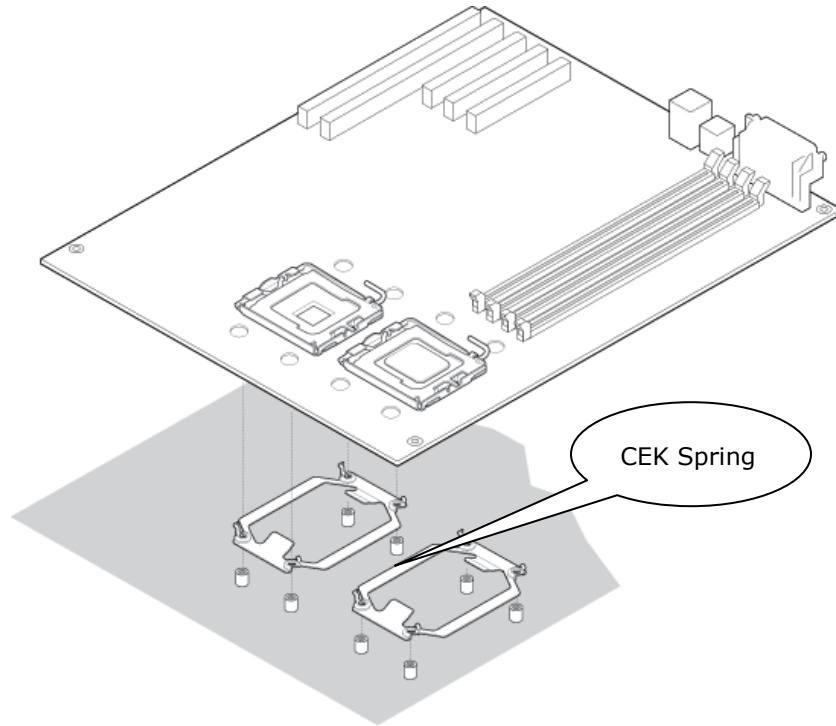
Verify the CEK Spring is Installed for Each Processor Socket
